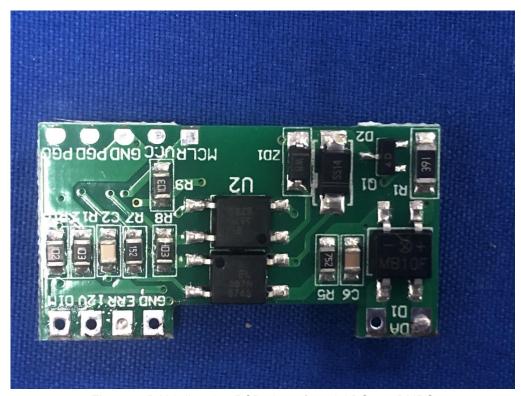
DALI dimming PCB view of model BQ-060DNPC
